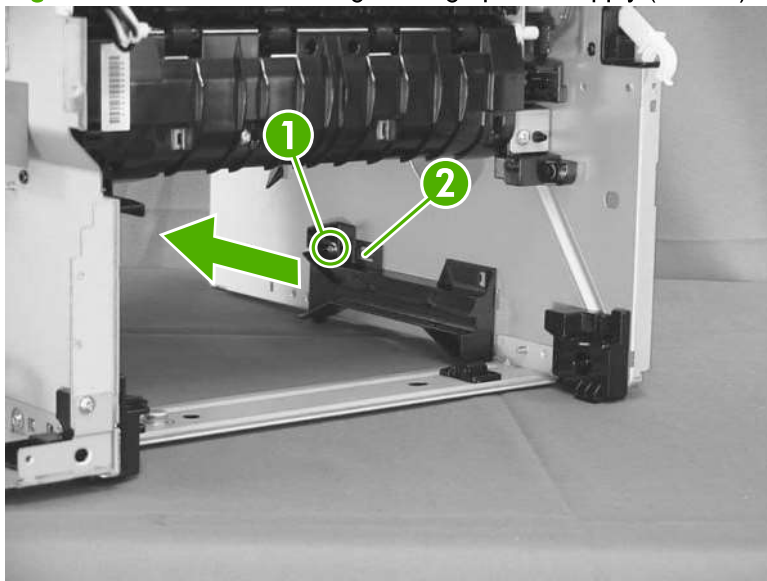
Remove the high-voltage power supply (4 of 11)
